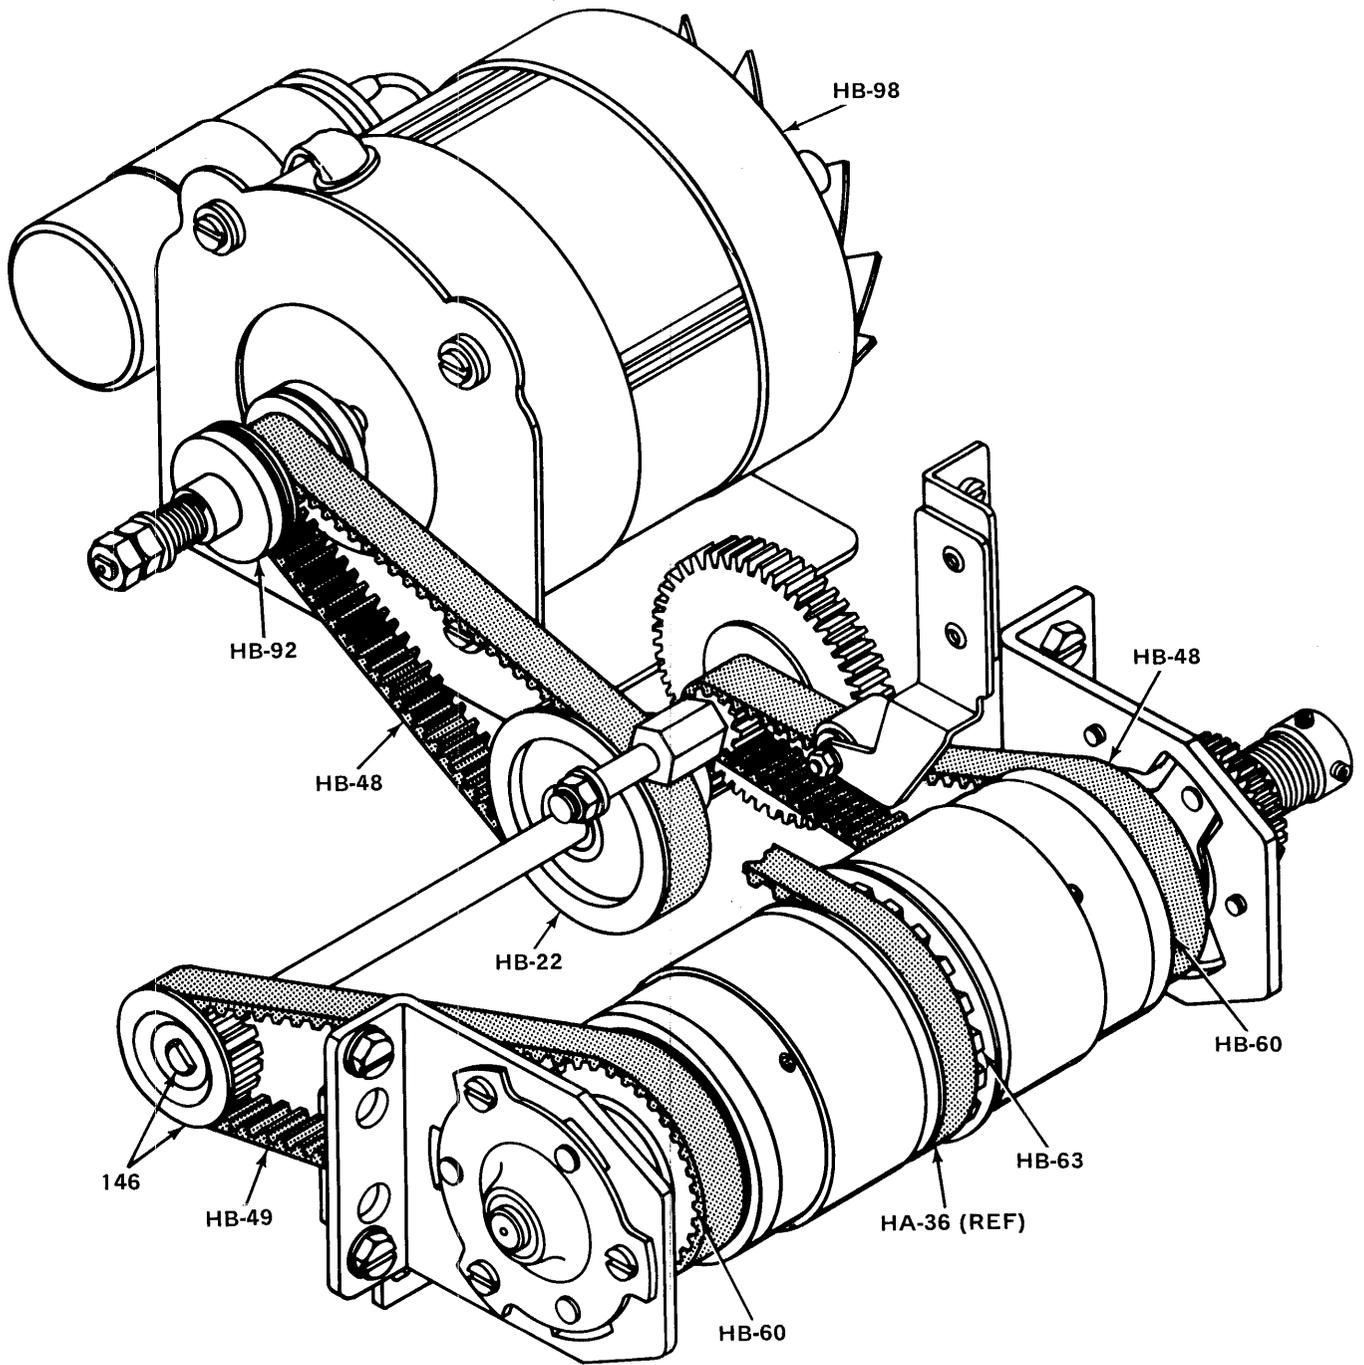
MAIN MOTOR DRIVE AND DRIVE BELT ARRANGEMENTS
